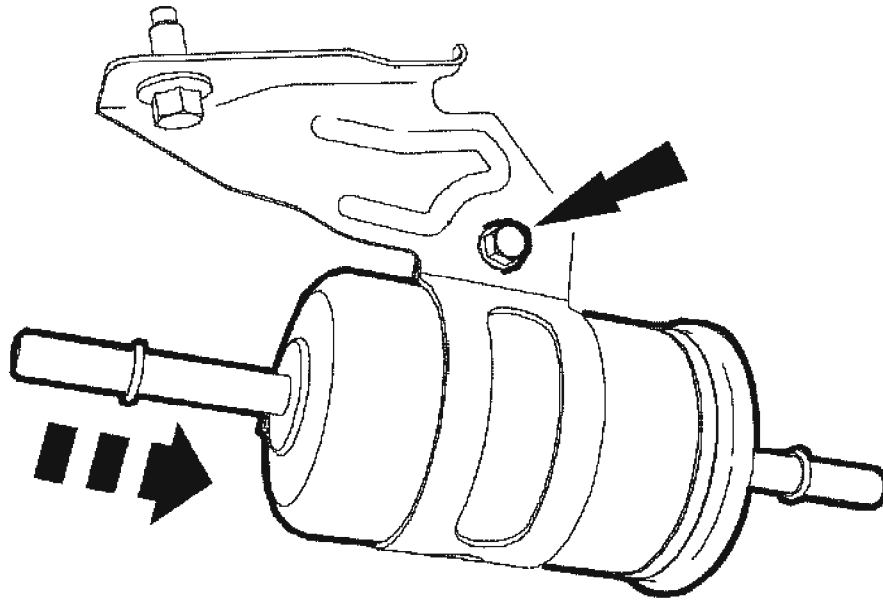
Removing Fuel Filter Inlet And Outlet Tubes
